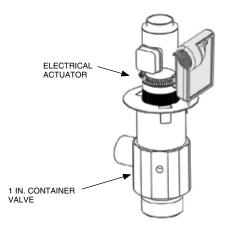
SWITCH INSTALLATION FOR 1 IN. VALVE
